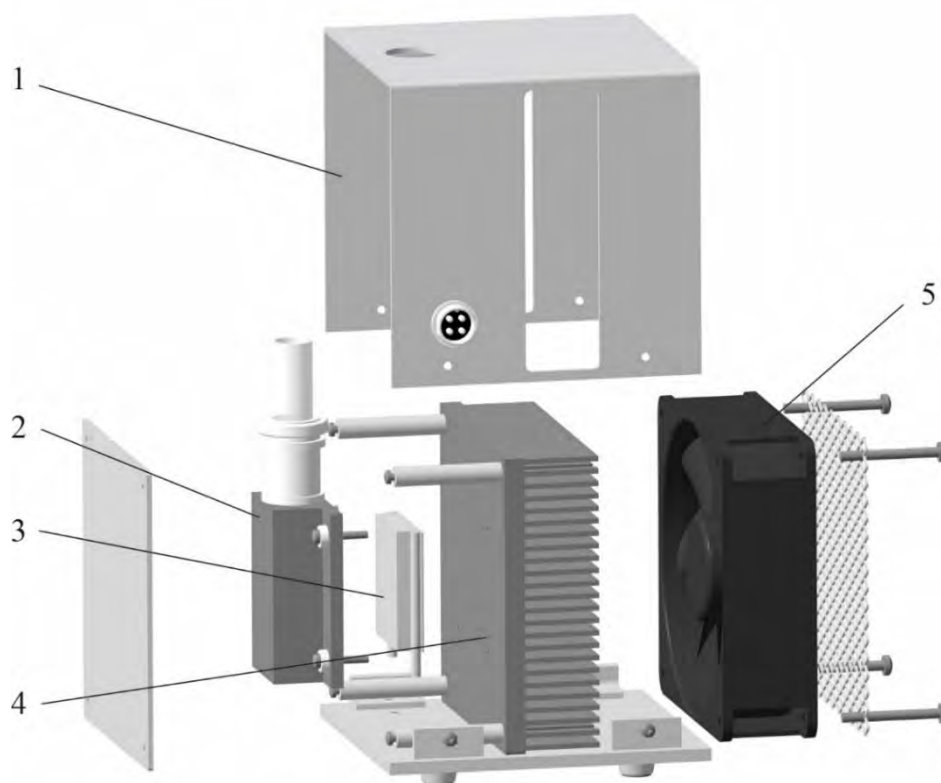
Cooling unit of thermoelectric condenser of pulmonary air: 1 – housing; 2 – working cooling chamber; 3 – thermoelectric module of the type Altec-2; 4 – air heat exchanger; 5 – fan.
